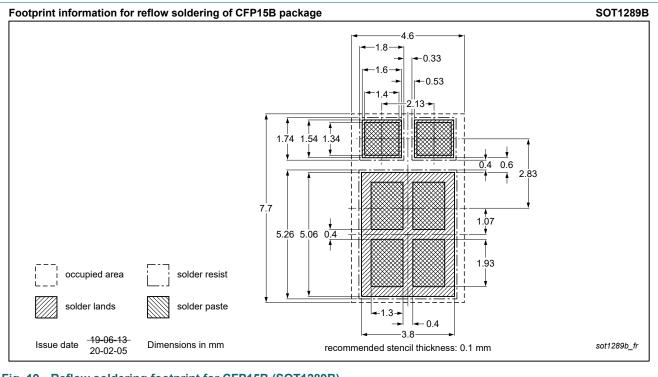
Reflow soldering footprint for CFP15B (SOT1289B)
